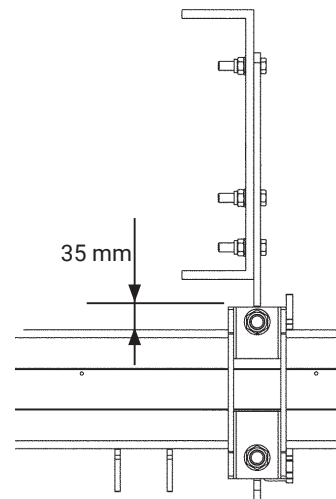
The chassis bracket requires at least 35 mm clearance between vehicle chassis and support frame
